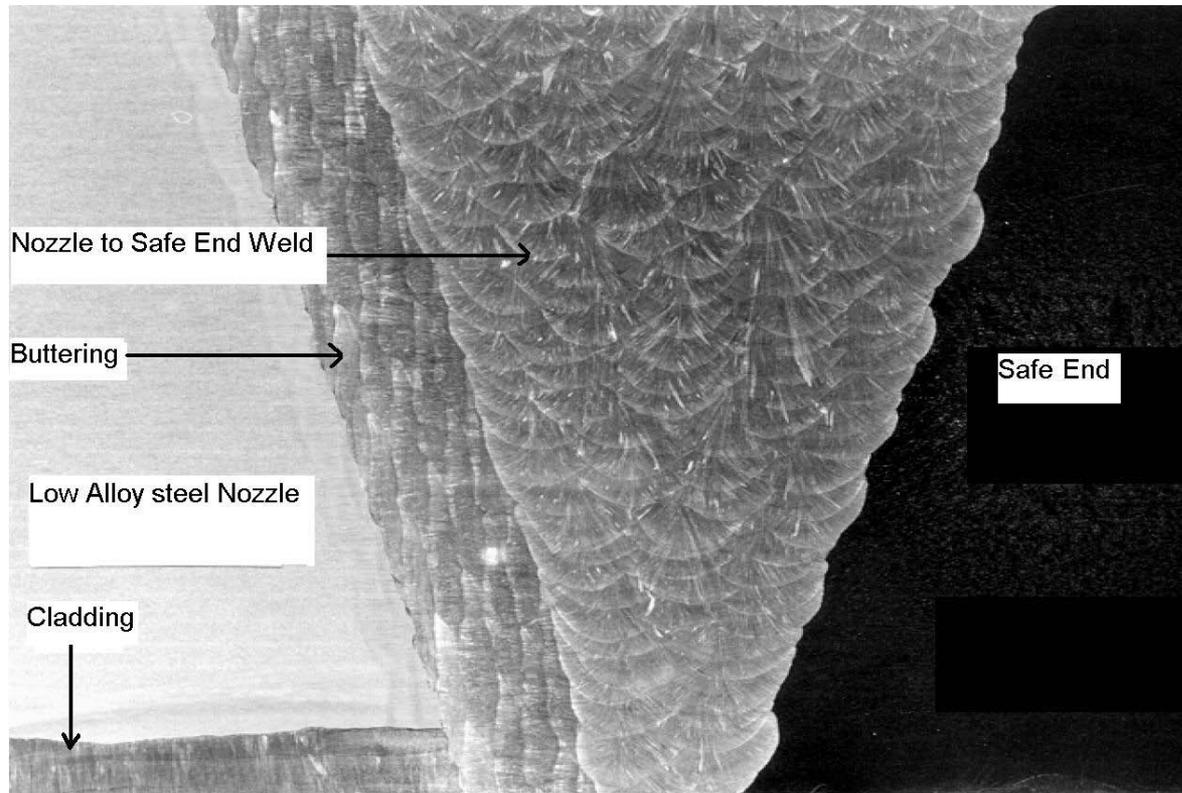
Typical DMW Weld Configuration With V-Groove Joint Design Using Buttering
